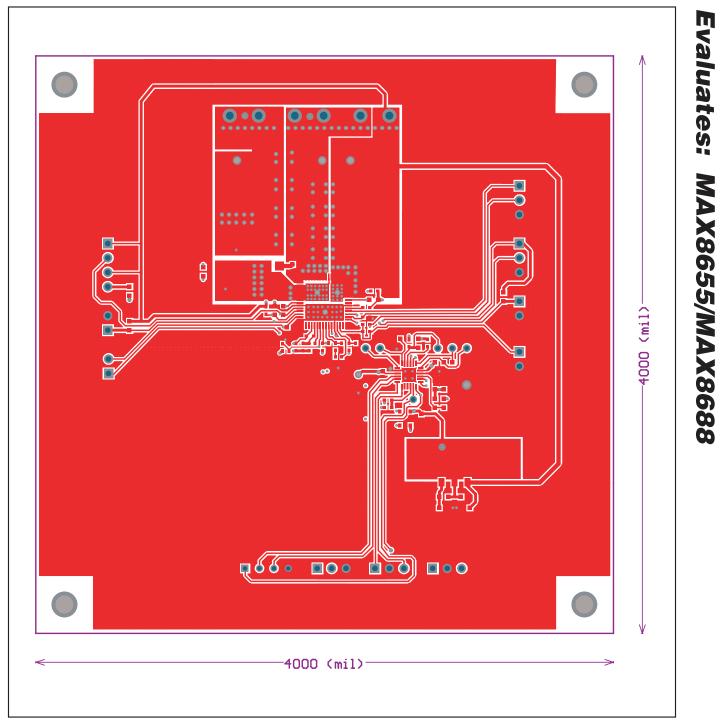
MAX8655 EV Kit PCB Layout—Component Side
